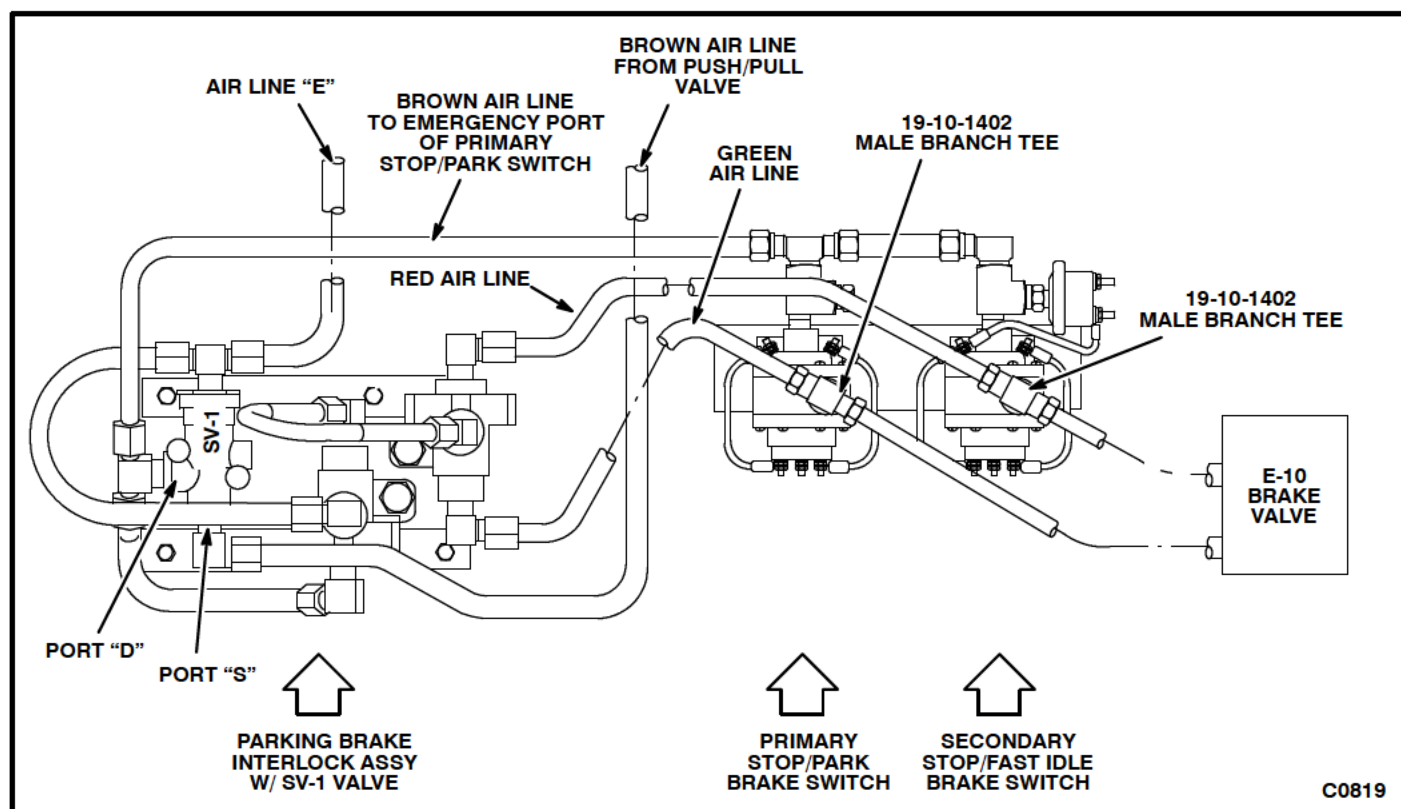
Brake System With E-10 Brake Valve and Parking Brake Interlock.
